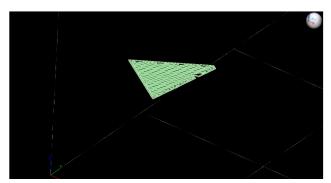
Isometric view of the -30° and bottom YZX oriented piece depicting a surface nick that would compromise the surface of the piece.
